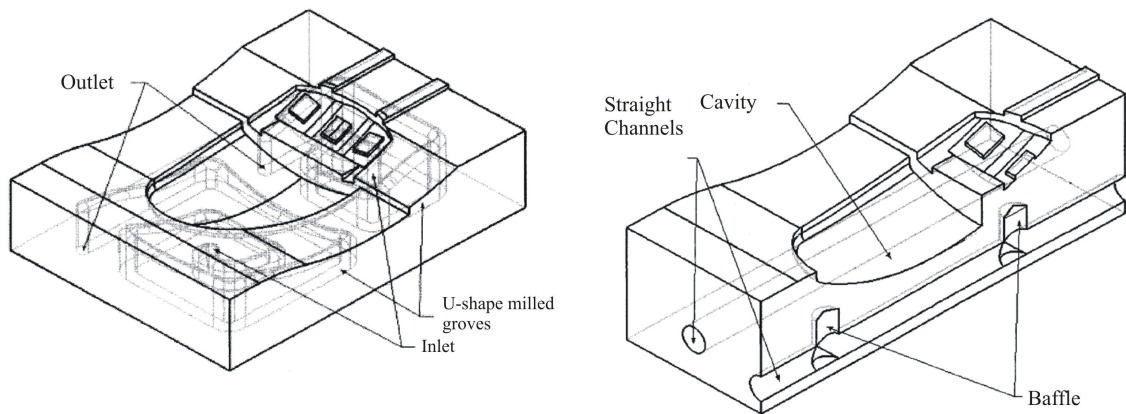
Cavity of a mouse cover with U-shape milled grooves and that of a mouse cover with straight cooling channels [9]
